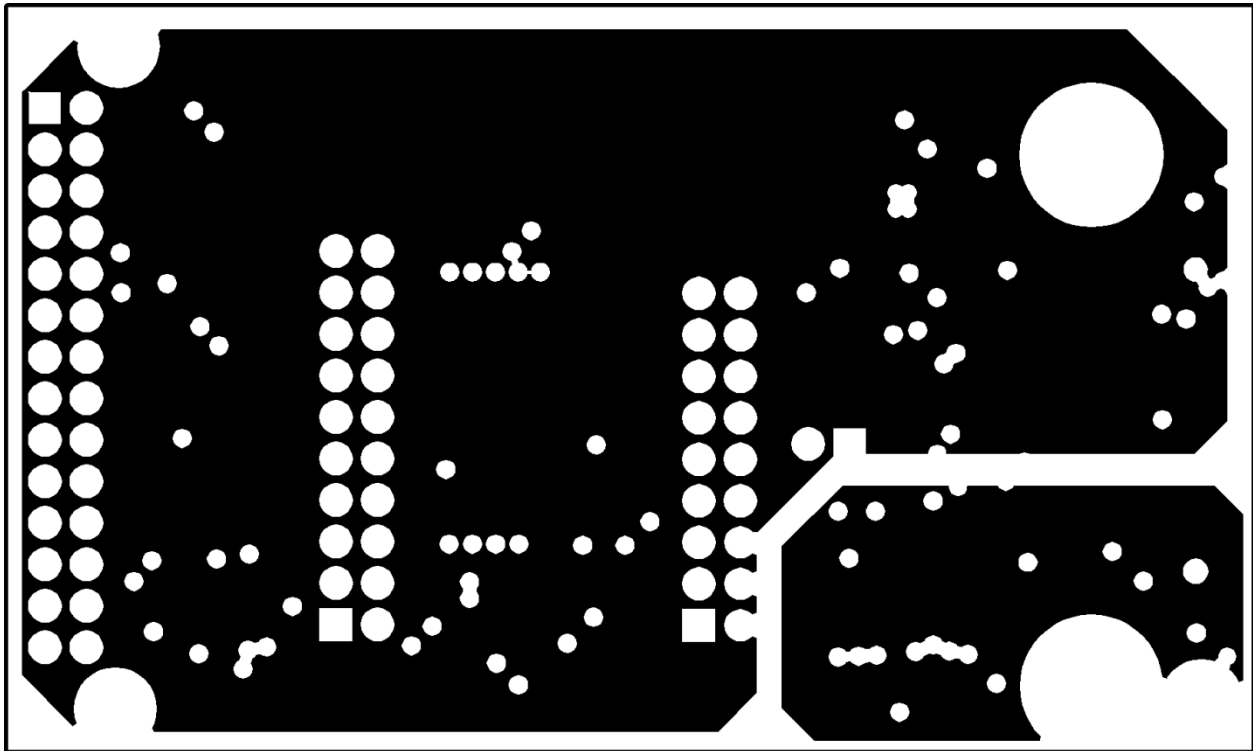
TLV2553EVM PCB Layer 3: Power Planes
